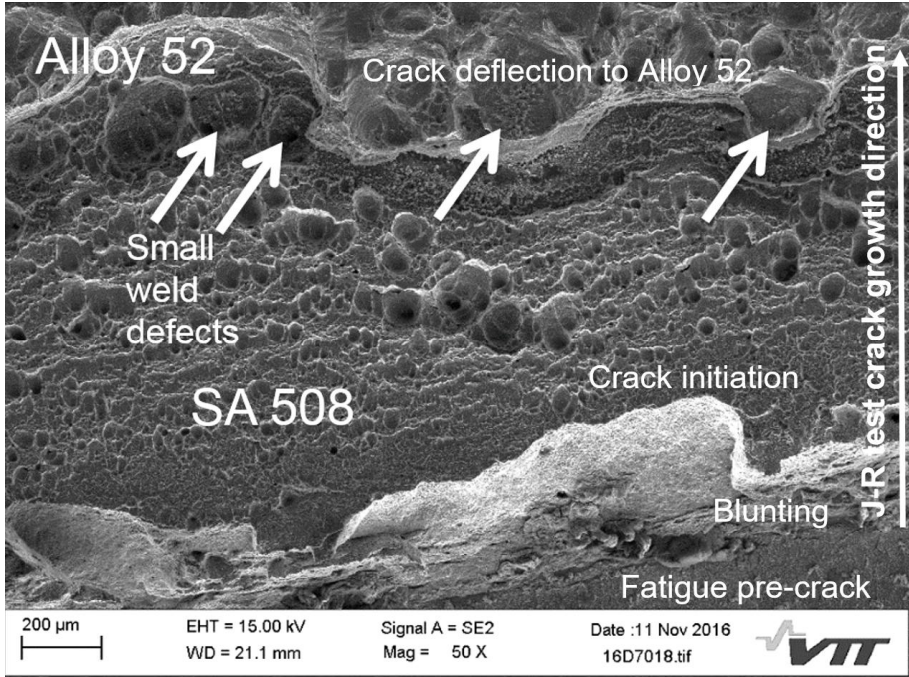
SEM image of the fracture surface of a J-R test specimen, T-S orientation, showing a location at the end of the fatigue pre-crack and the onset of the J-R test crack growth. There are numerous small weld defects at the location of crack deflection to Alloy 52.
